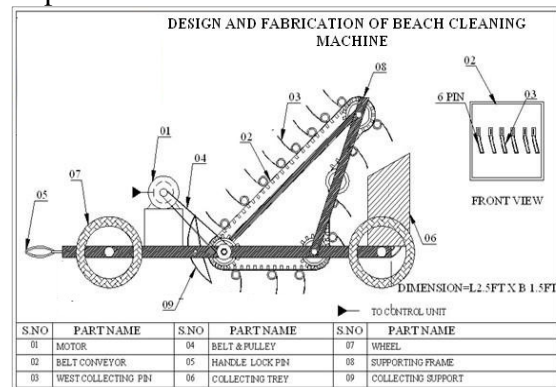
Drawing for Design And Fabrication Of Beach Cleaning Machine
